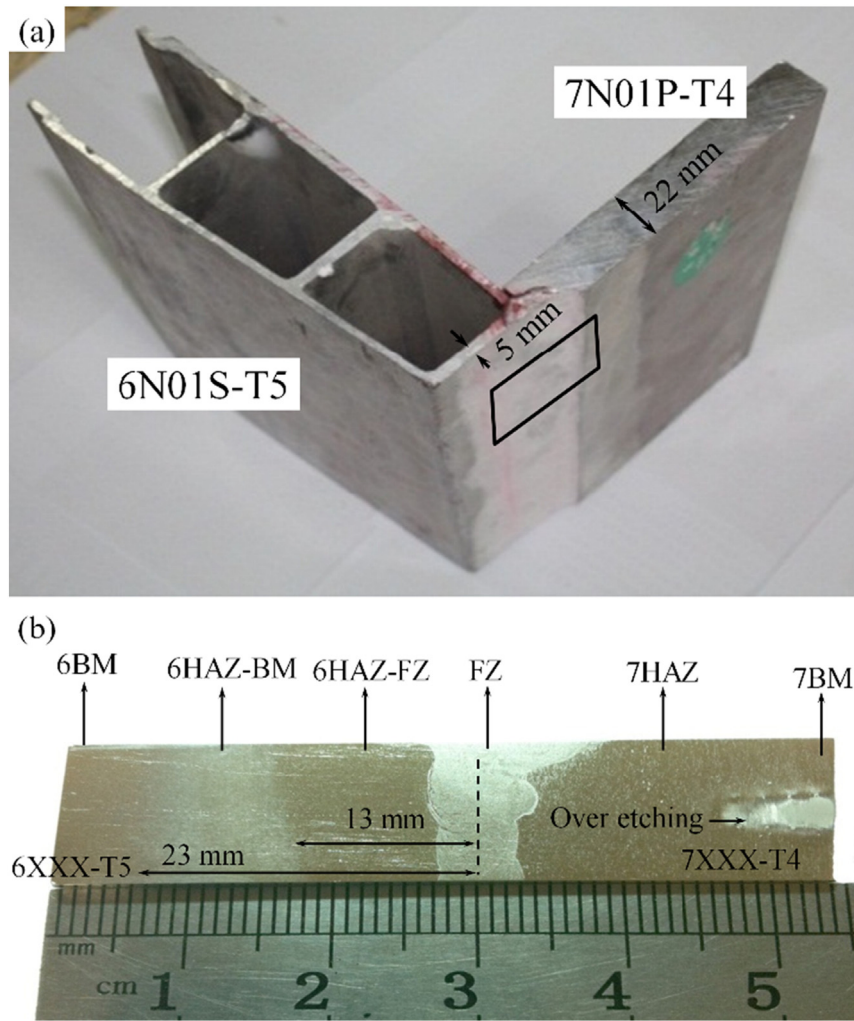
The 6N01S-T5 - 7N01P-T4 welded sample. (a): optical image of the weldment. (b): optical image of the cut-out sample after electrochemical polishing.
